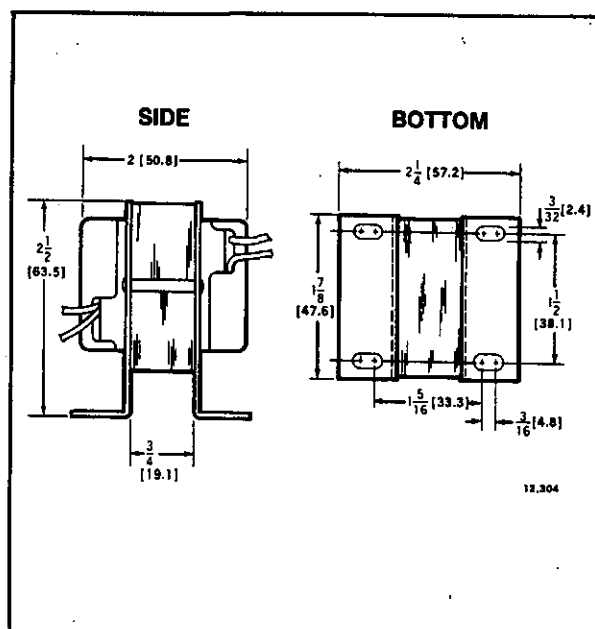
AT20C DIMENSIONS IN in. [mm IN BRACKETS].
